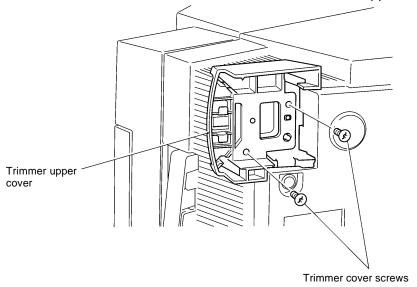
Removing the Trimmer Upper Cover 2
